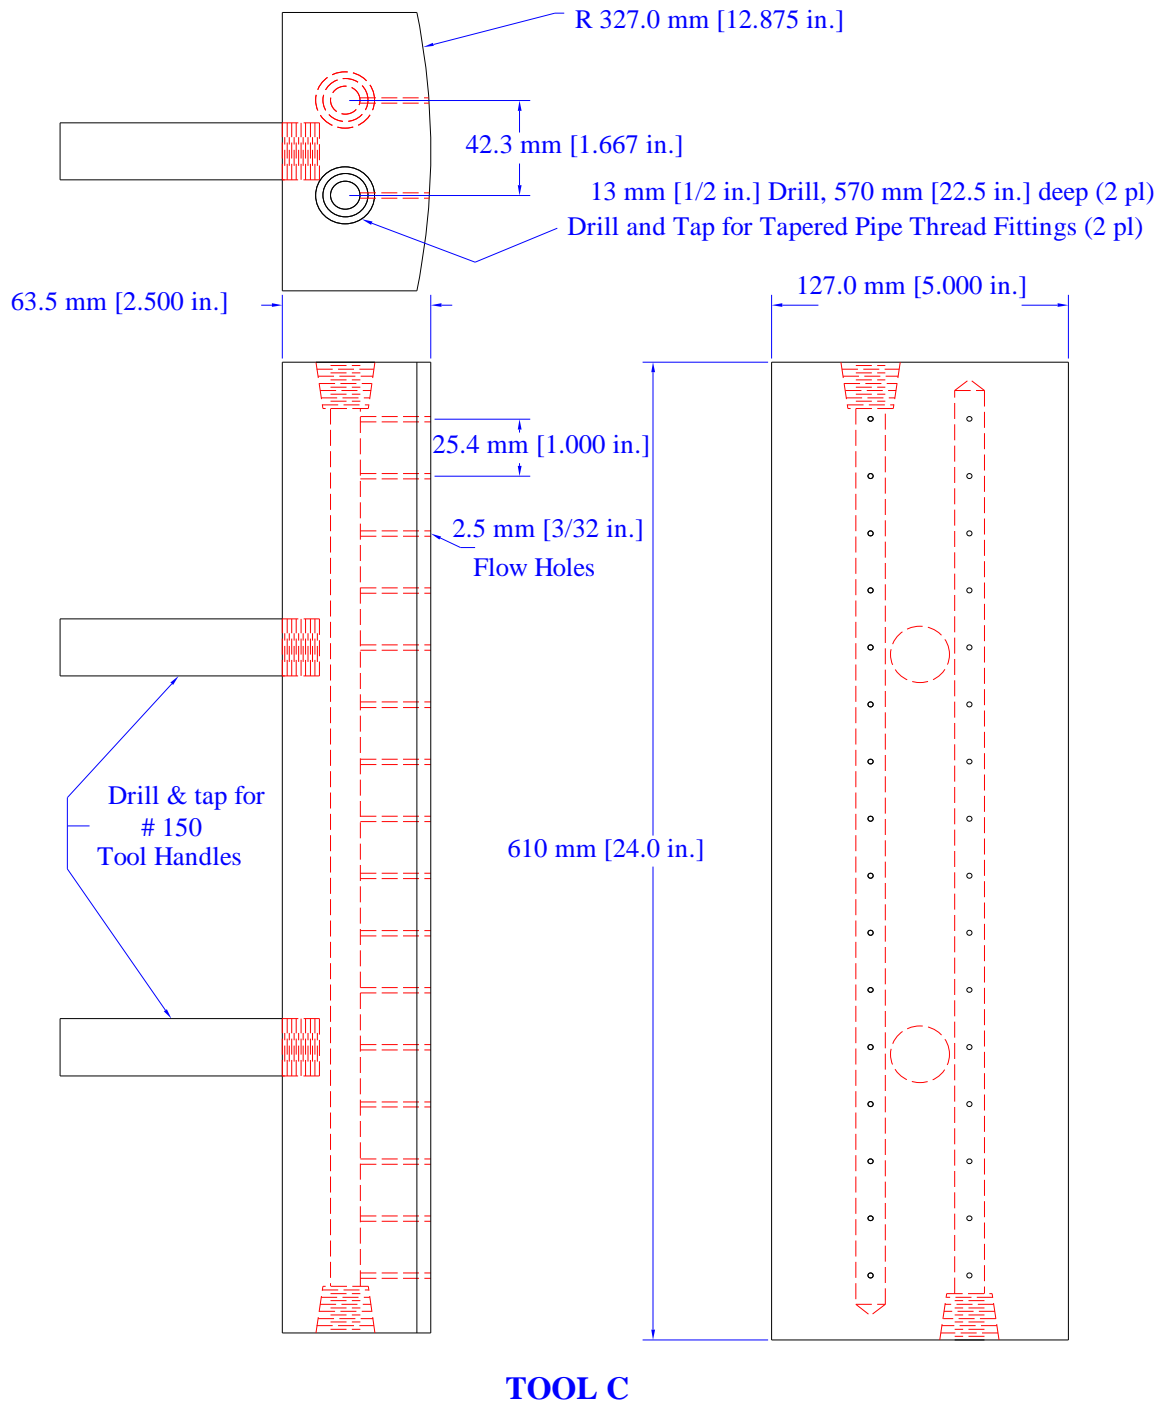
Special plating tool for plating a 660 mm (26 in.) ID, 508 mm (20 in.) long part with Babbitt.
